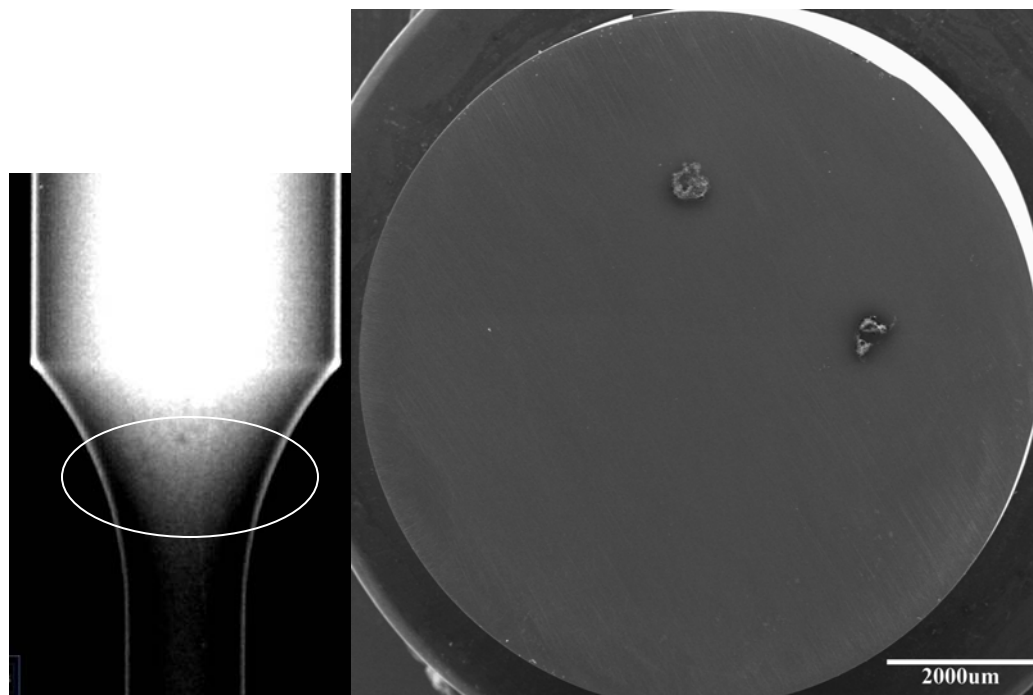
Radiograph with Indicated Porosity Zone and a Macroscopic View of a Cylinder with 3 mm Disc Specimen with the Fracture Surface Ground Back (Specimen H5)
